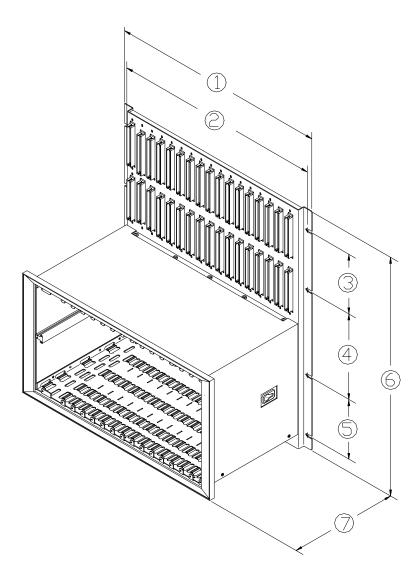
Dimensions of a Bulkhead Mount 3500 rack
